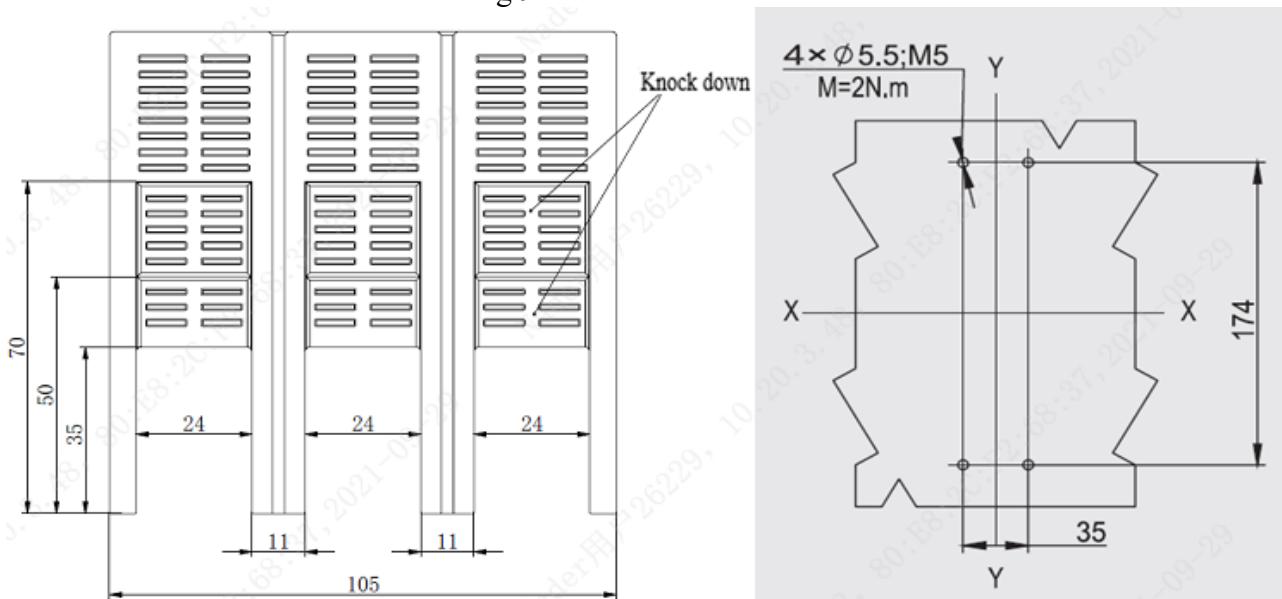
NDM5-250U/R 3P Outline dimension drawing of front board wiring products
